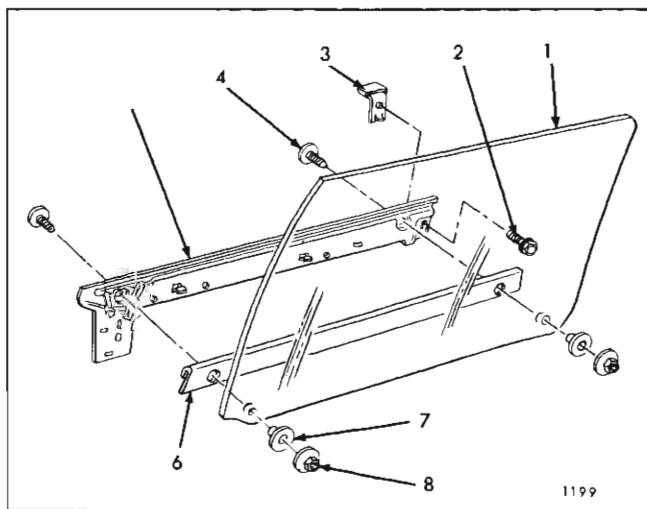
D64—Rear Door Window Assembly - 68069 Style
